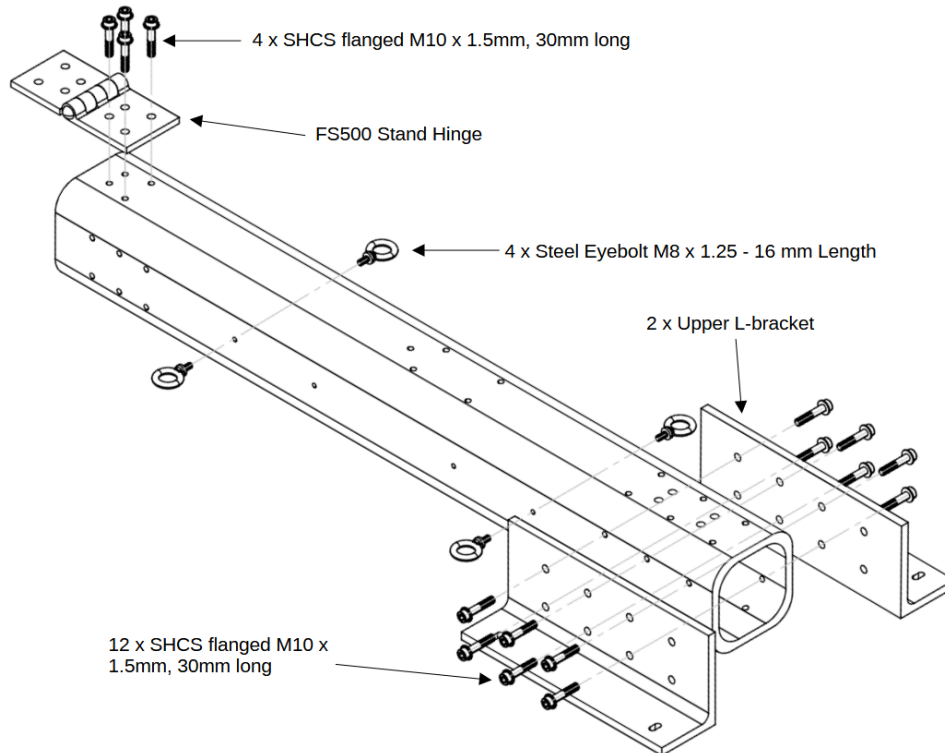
Hinge, eye bolts and Upper L-Brackets mounting on the Upper Tube
